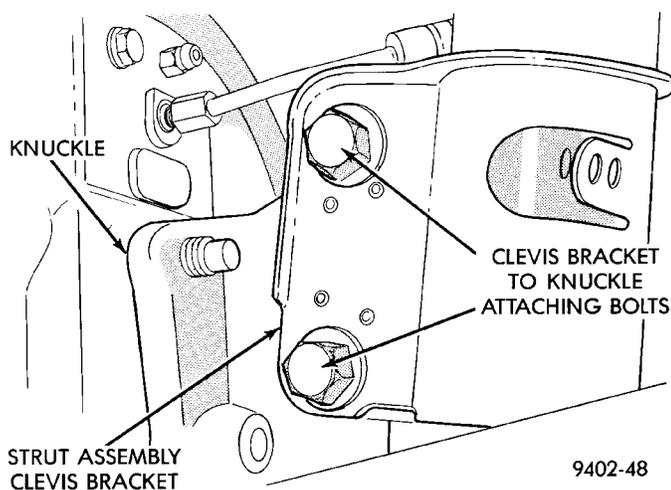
Rear Strut Clevis Bracket Attaching Bolts
